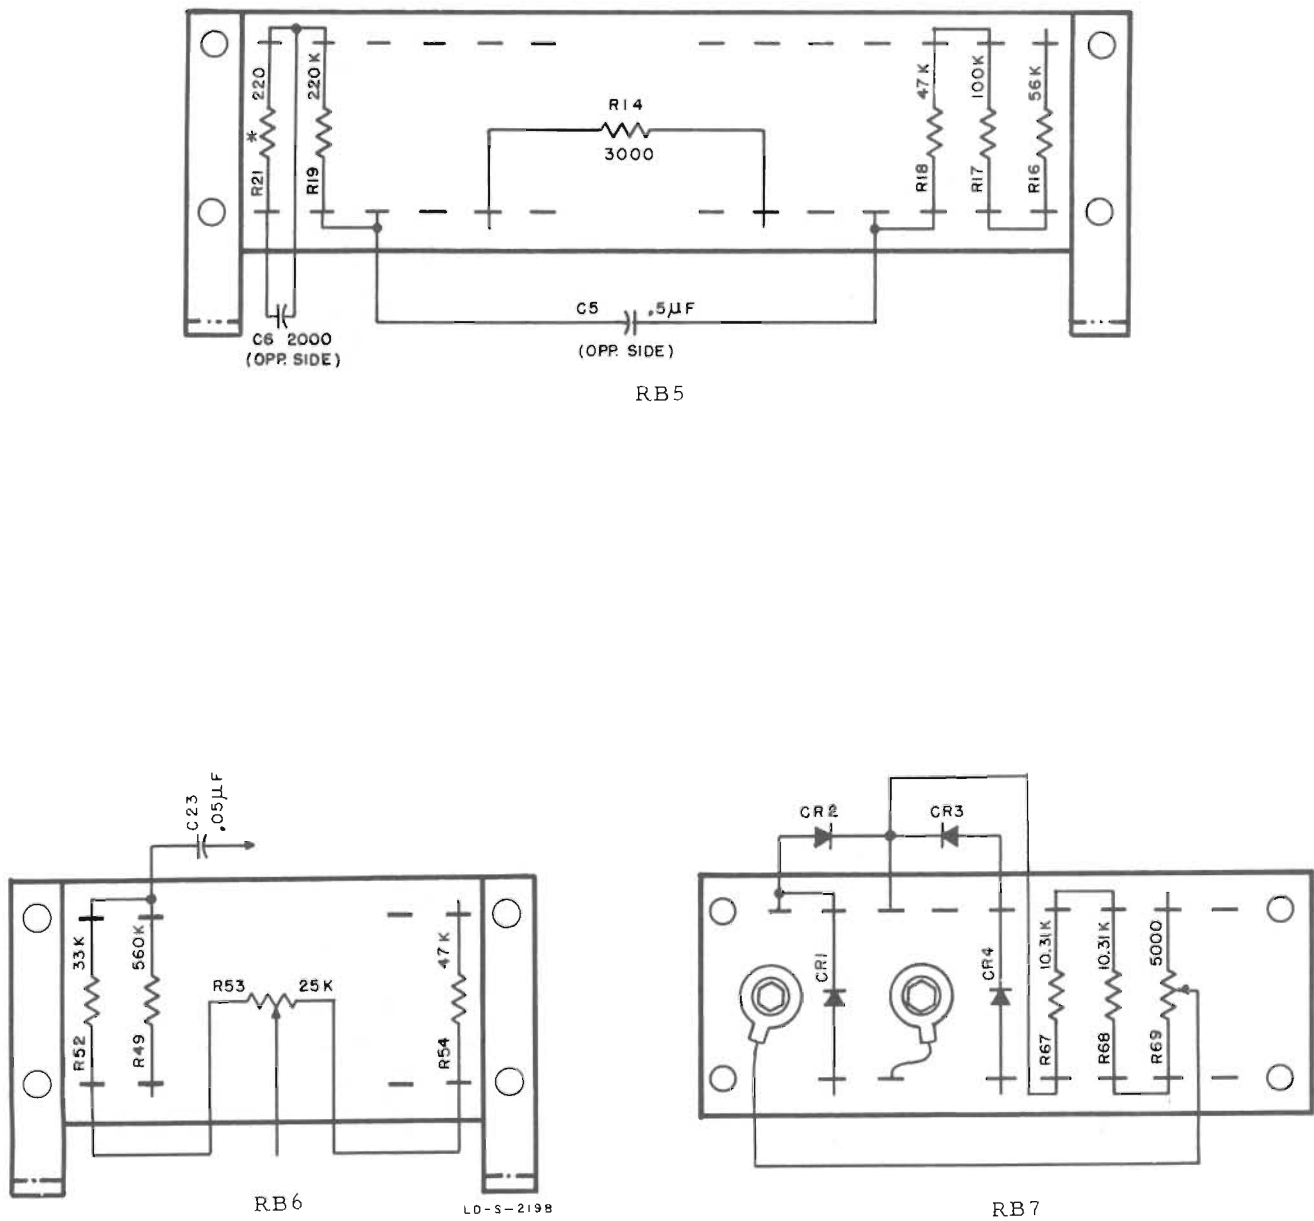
Model 233A Resistor Board Details (Sheet 2 of 2)
